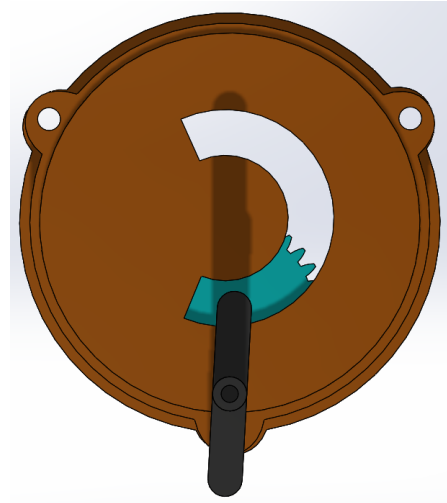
Housing of the compounded epicyclic gear mechanism
